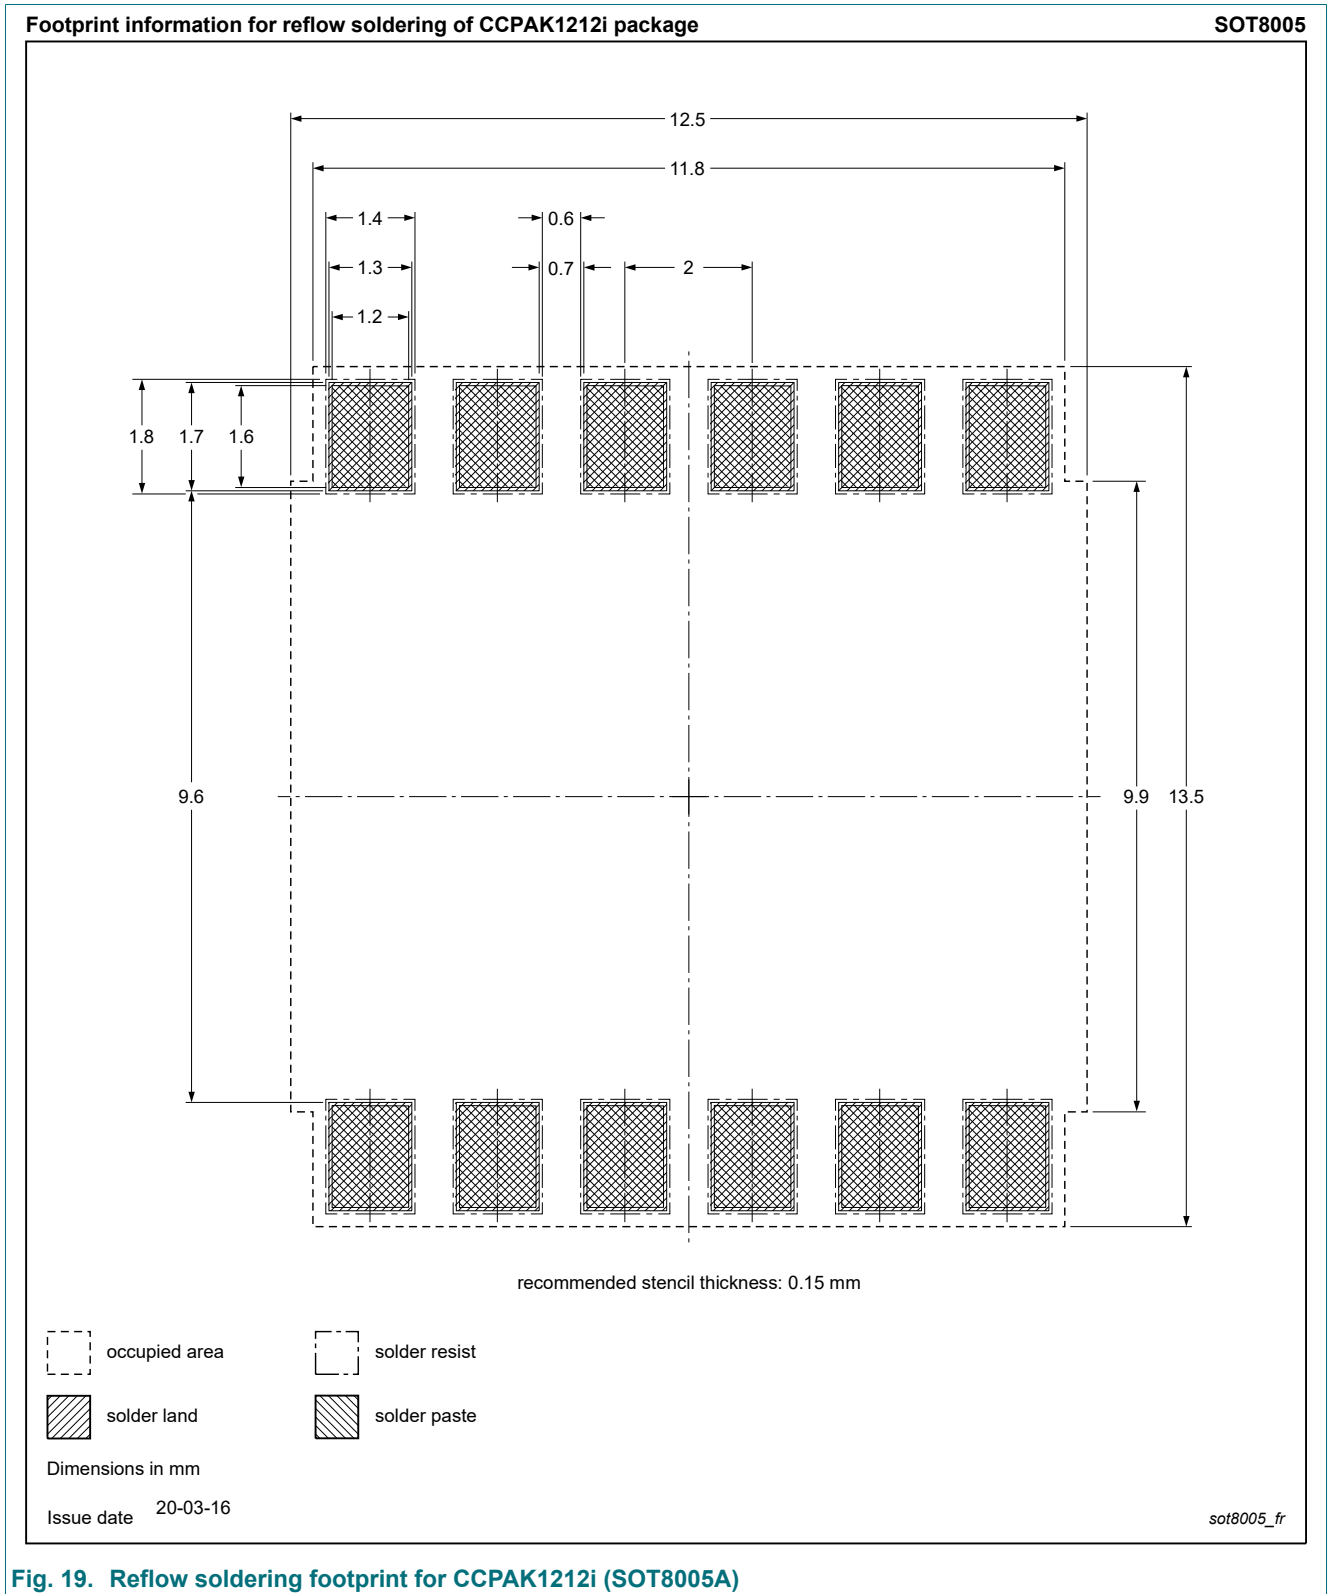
Reflow soldering footprint for CCPAK1212i (SOT8005A)
